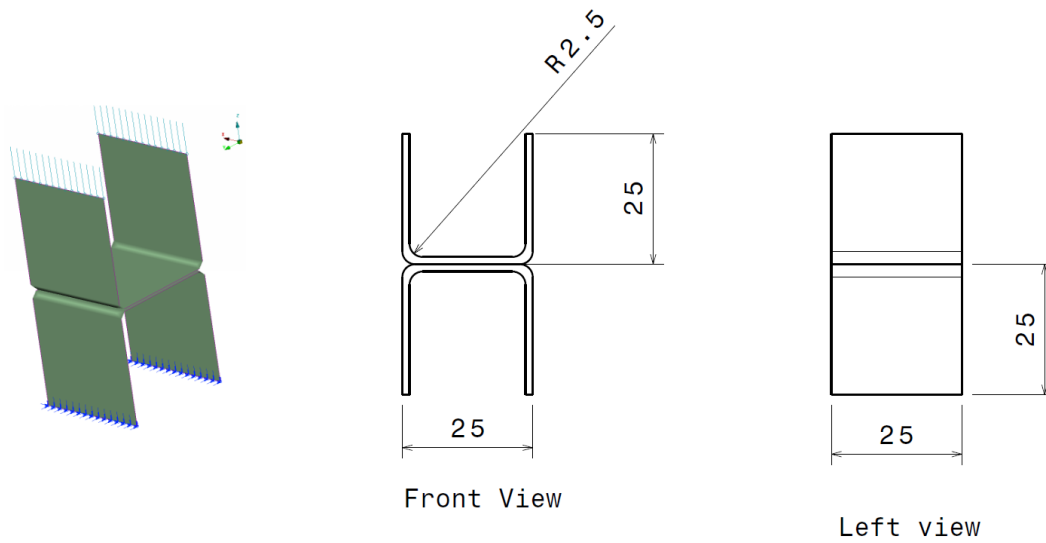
The geometry shown is for testing of u-tension specimen.
